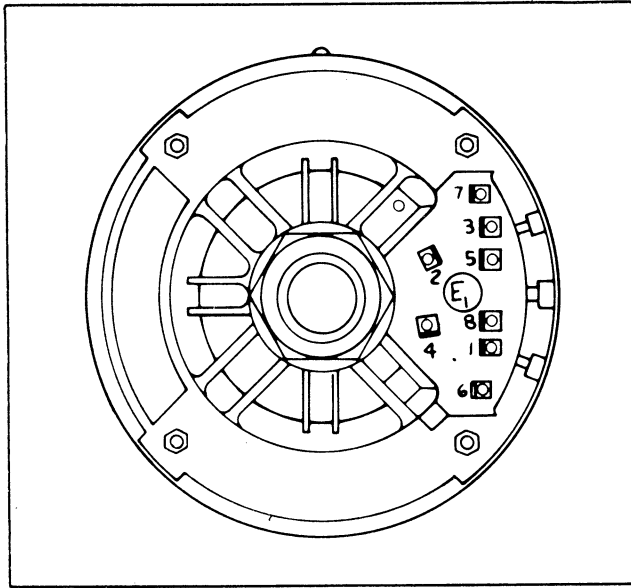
C — Motor Terminals—Alternate Two Speed Motor
